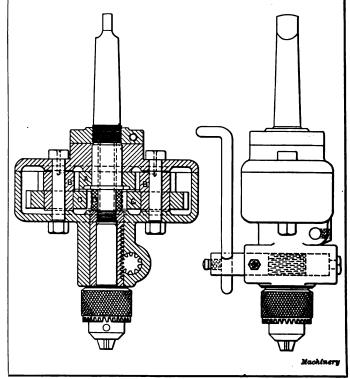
Cross-sectional View and Outline of Speeder shown in Fig. 6 sure applied to the shank from above and the pressure delivered to the spindle, chuck and drill below. This arrangement is clearly shown in the sectional view Fig. 4.
